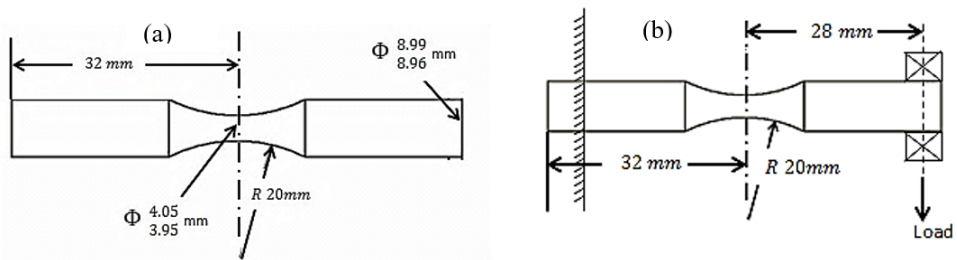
Fatigue test specimen: (a) dimensions; (b) upon mounting between fixed end near the motor and free end at bearings.
